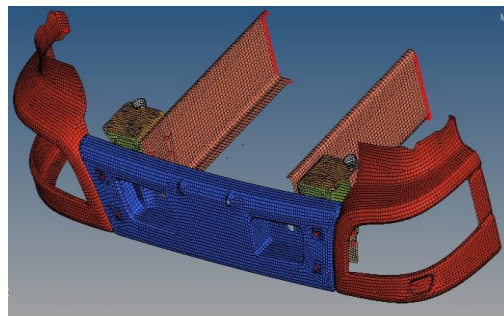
Bumper system assembly mesh model (front view). *Source: Own.
